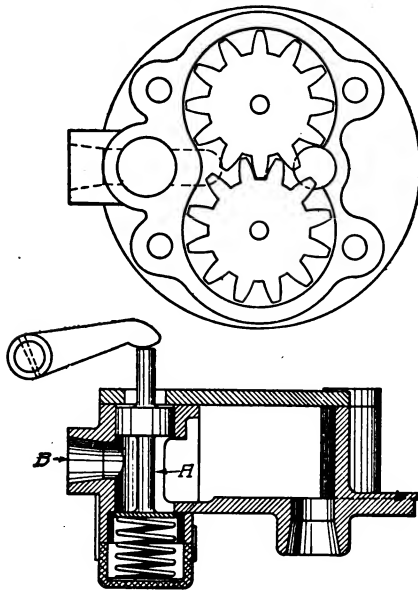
Detail of Throttle-Connected Plunger in Marmon Oil Pump
